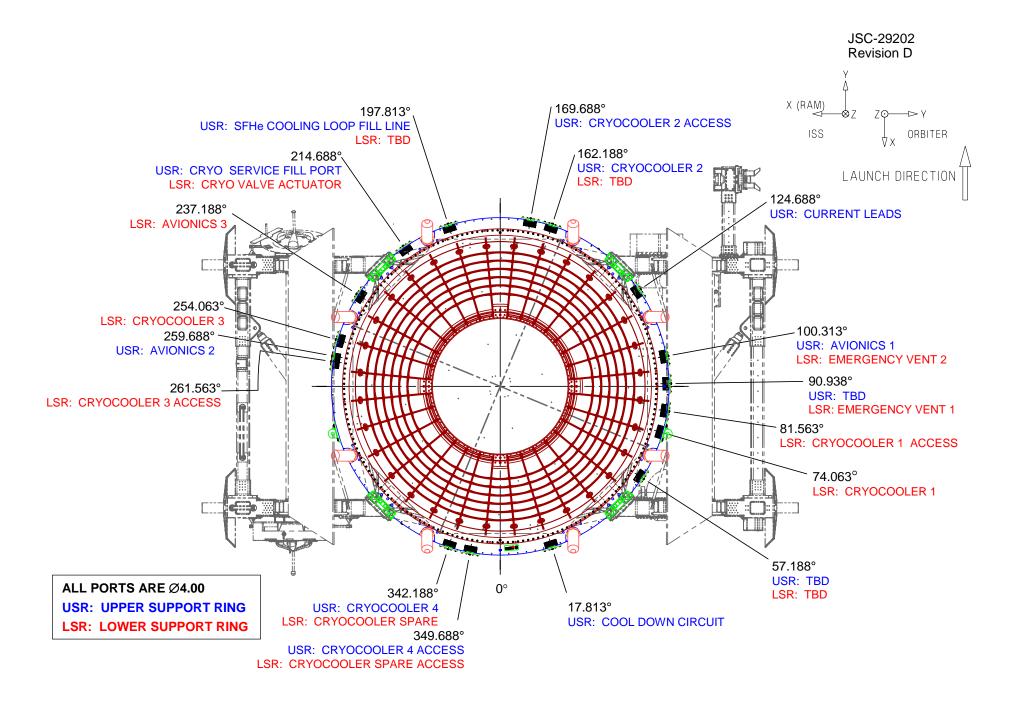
Plumbing and Electrical Port Locations
